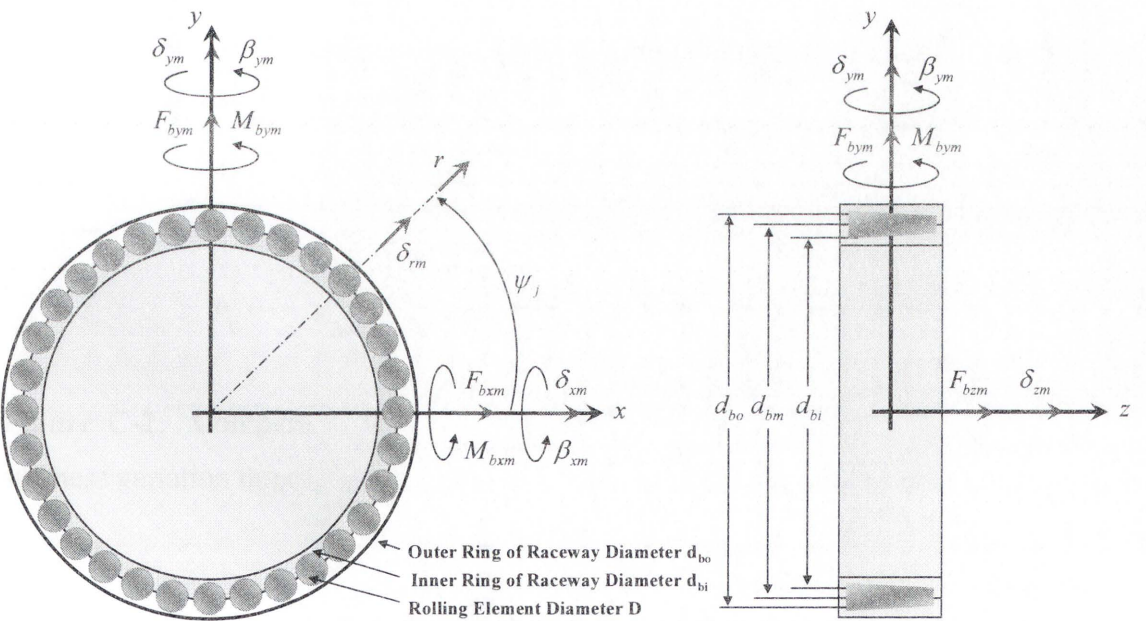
Tapered roller bearing in the work roll (Rolling element bearing)
